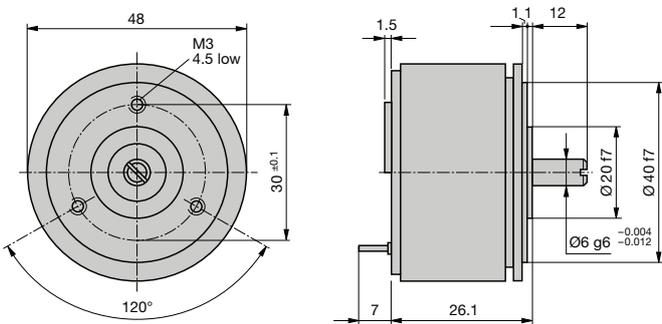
KINAX 2W2 with special drive shaft at front only,
